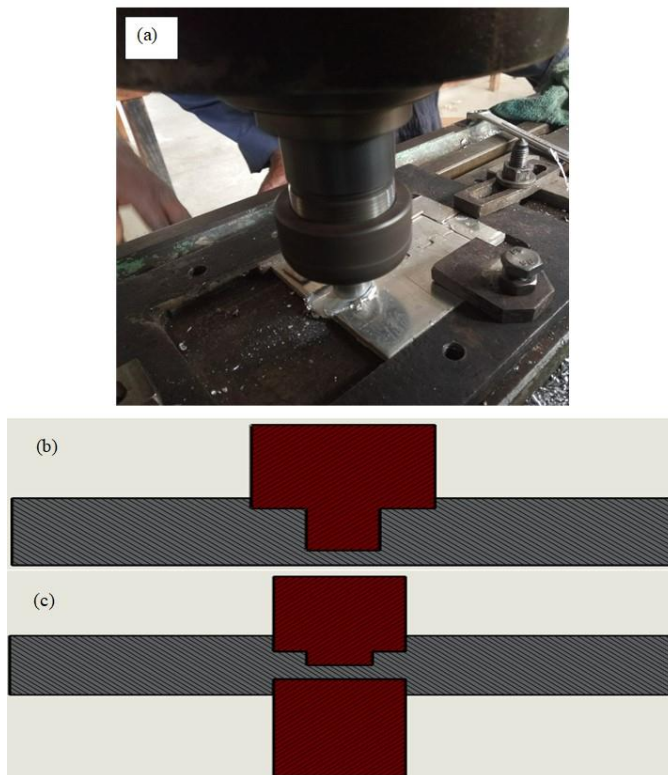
Schematic representation of the IFSW processes: (a) single-sided IFSW welding (welding of the first side), (b) schematic illustration of the single-sided IFSW, (c) double-sided IFSW welding
